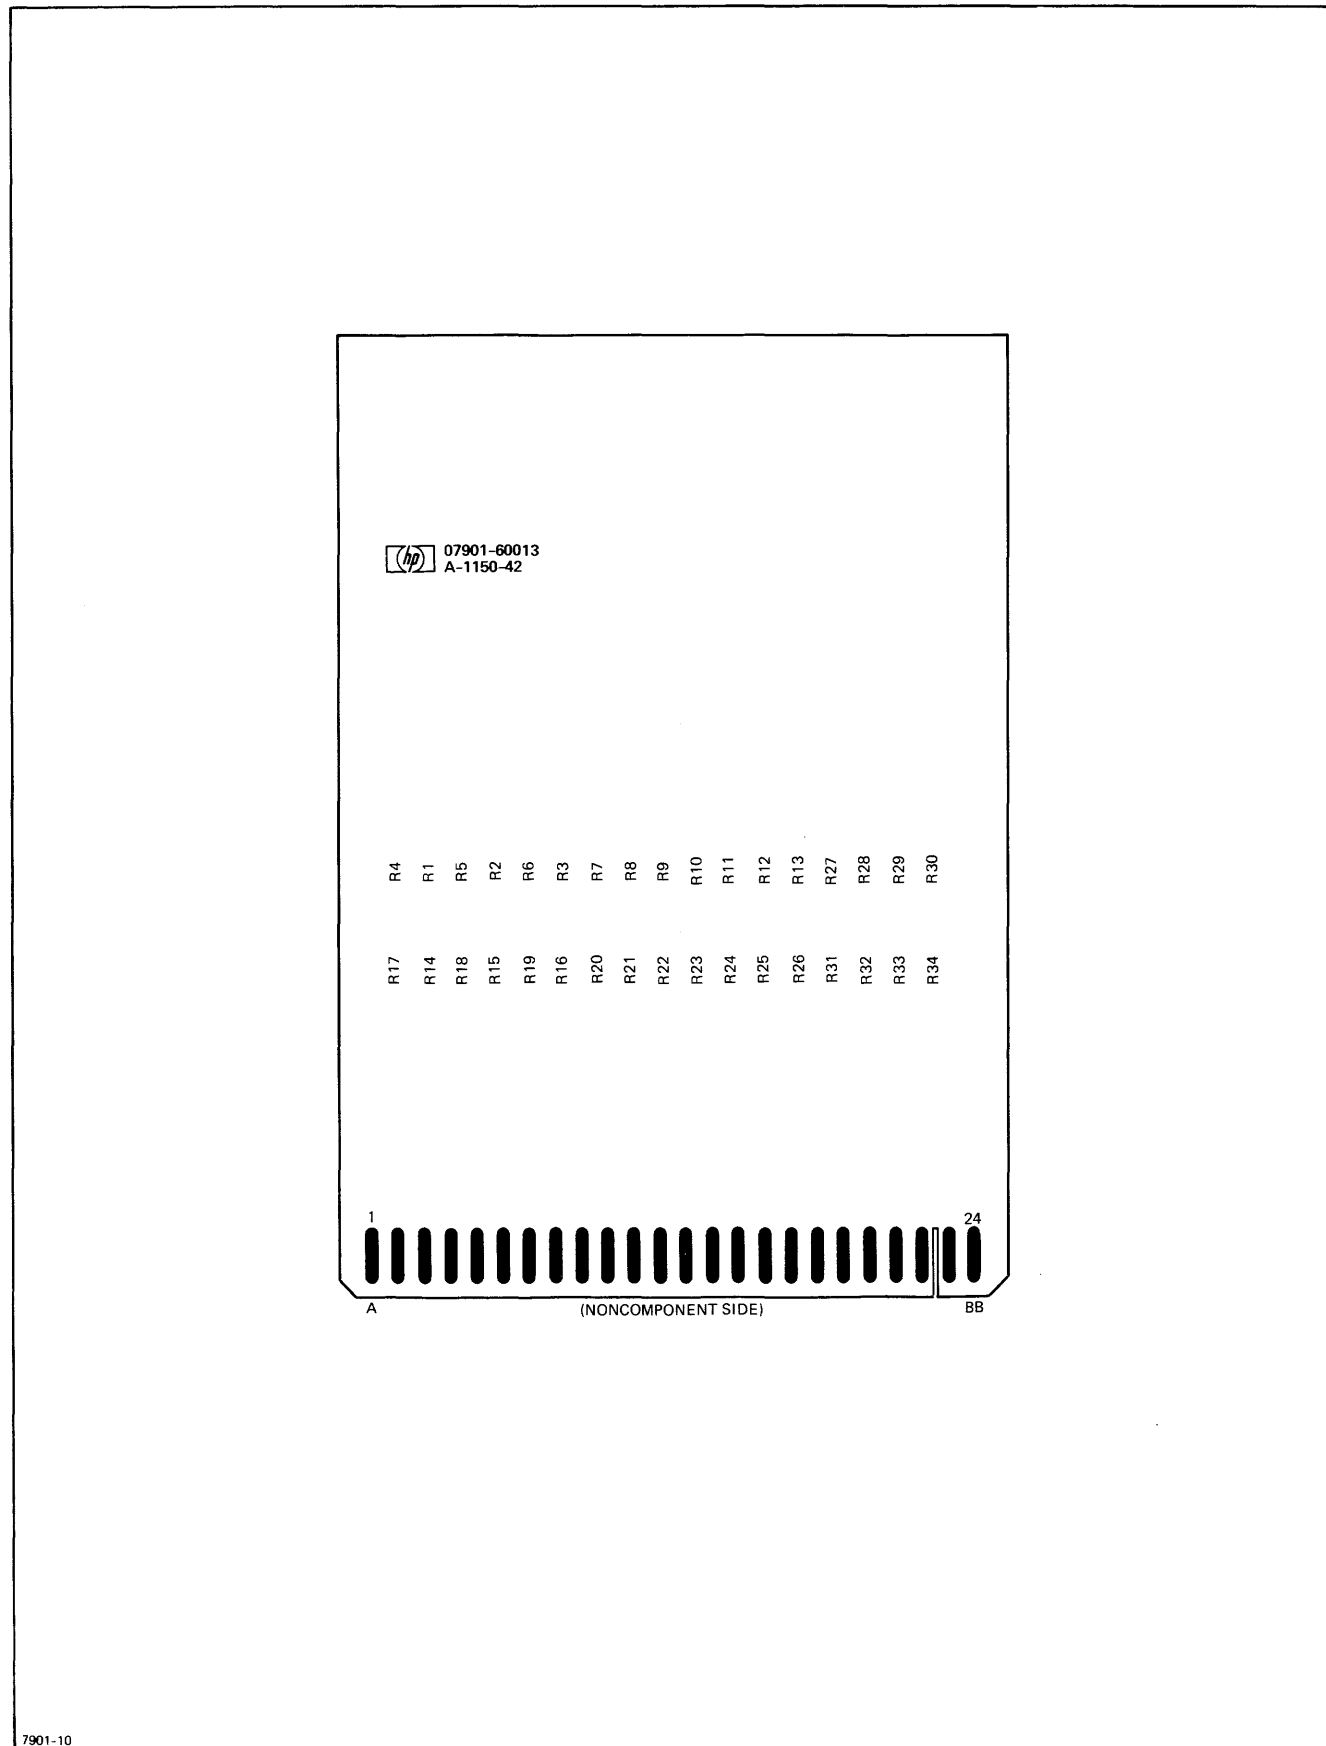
Termination PC Assembly A16, Parts Location Diagram
